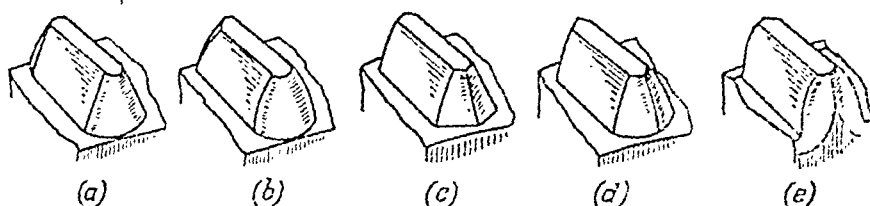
Shapes of the rounded tooth ends on sliding gears:
